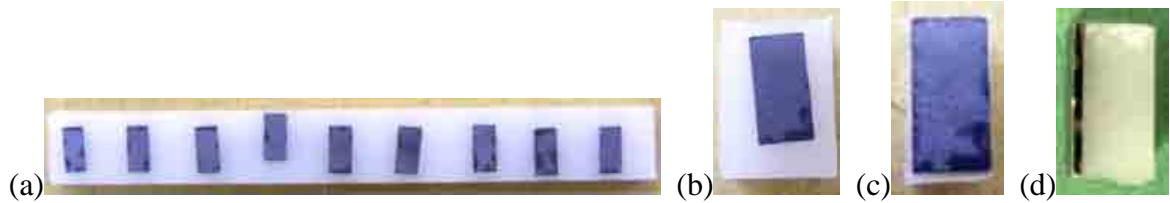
Stages of cutting out the pull-off test samples. (a) samples separated from the polyethylene sheet using a flexural cutter, (b) individual sample separated using a knife, (c) excess material removed from around the sample using a knife, (d) final milled sample (side view).
